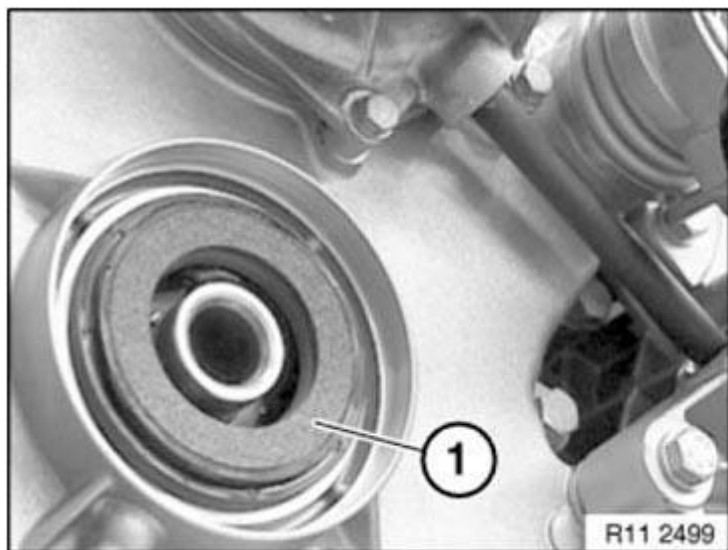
Identifying Radial Shaft Seal On Lower Gear Case Cover
